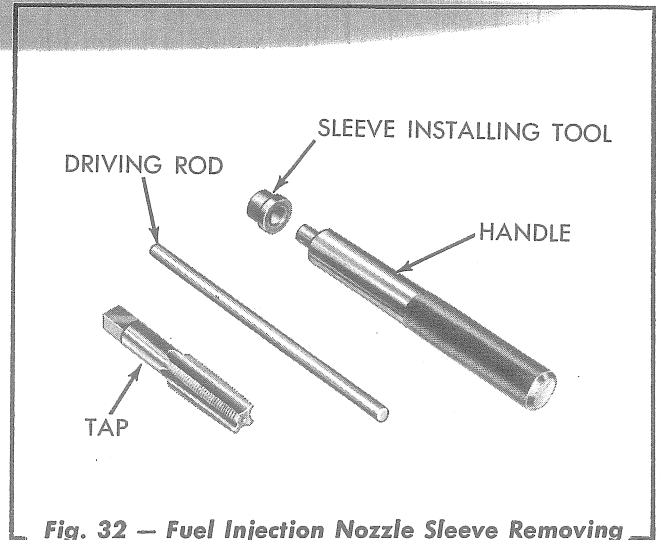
Fuel Injection Nozzle Sleeve Removing and Installing Tool Details (Tractors Serial No. 4001 and Above)
